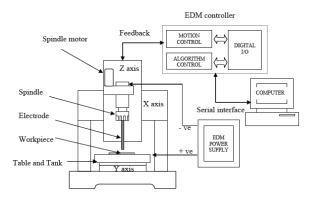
Schematic diagram of the setup with multi-purpose miniature machine tool.
